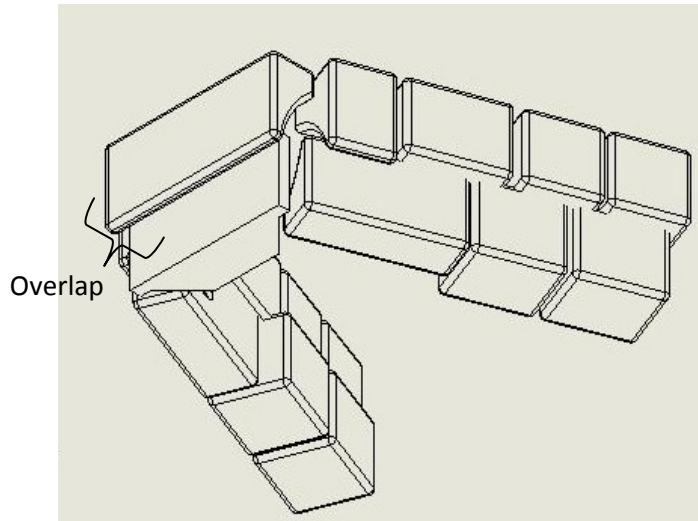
Isometric view of upper and lower palates creating a slight overbite
